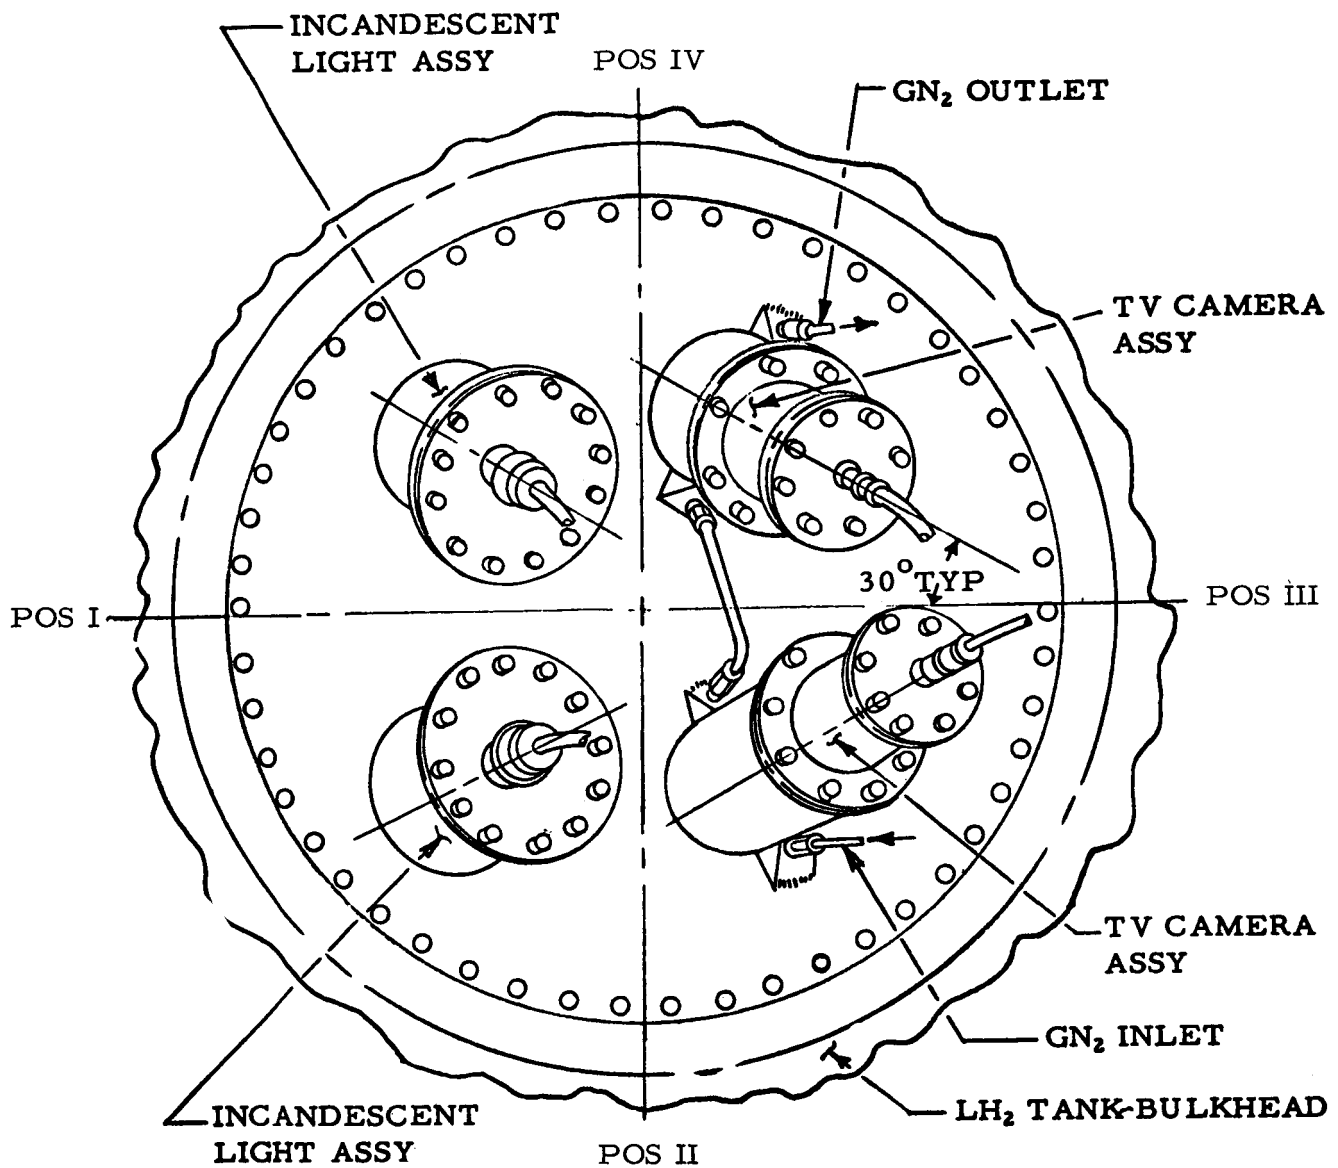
MANHOLE COVER ASSEMBLY, TOP VIEW
